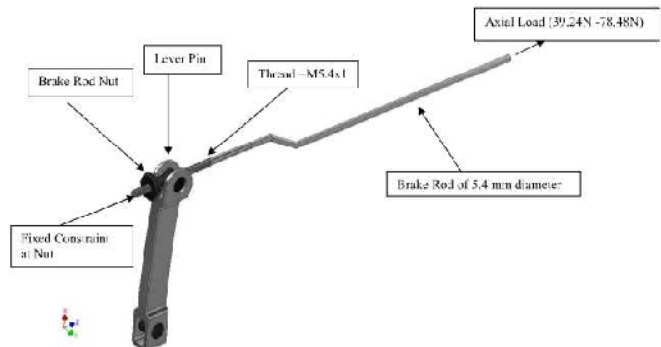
Constraints and Loading condition of Brake Rod of diameter 5.4mm.
